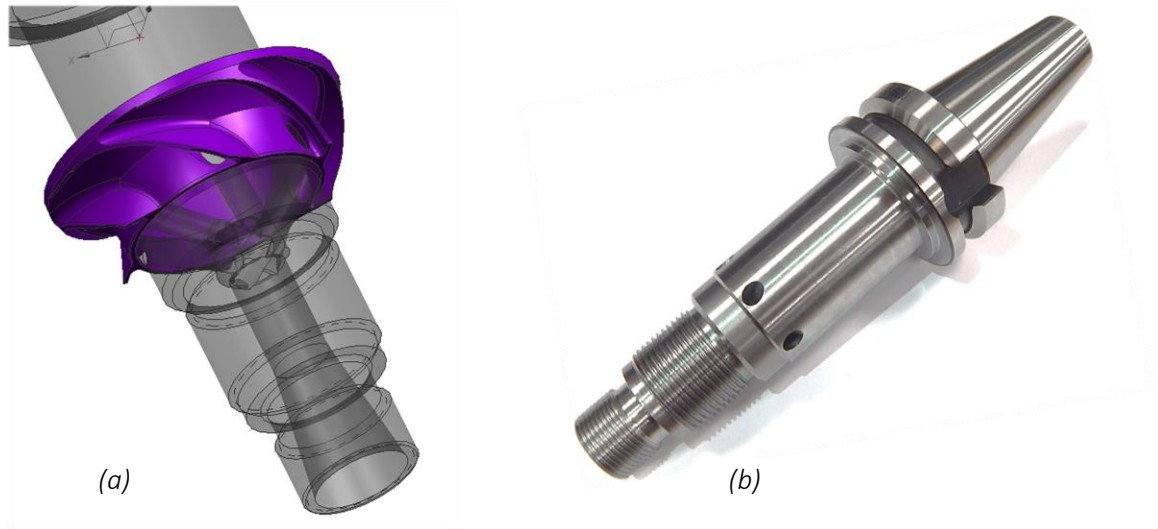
(a) CAD isometric view, (b) Finished part
